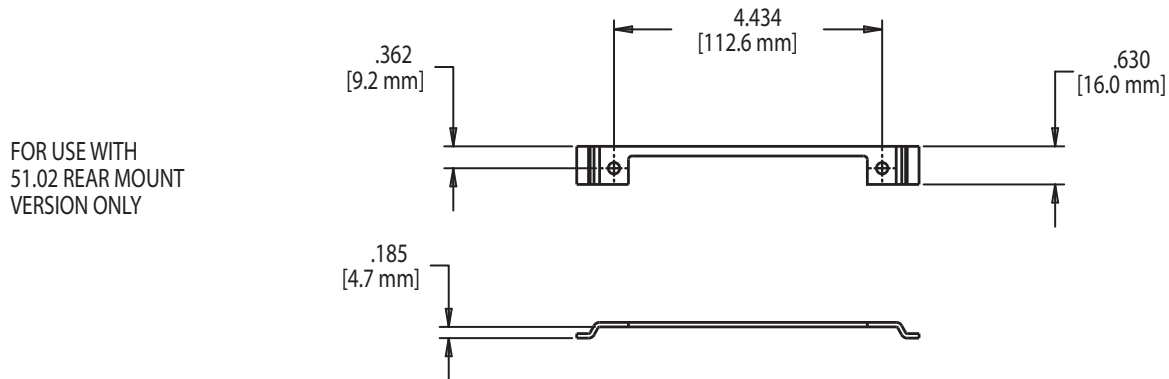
TRACK & SLIDER ASSEMBLY 11576.XX
